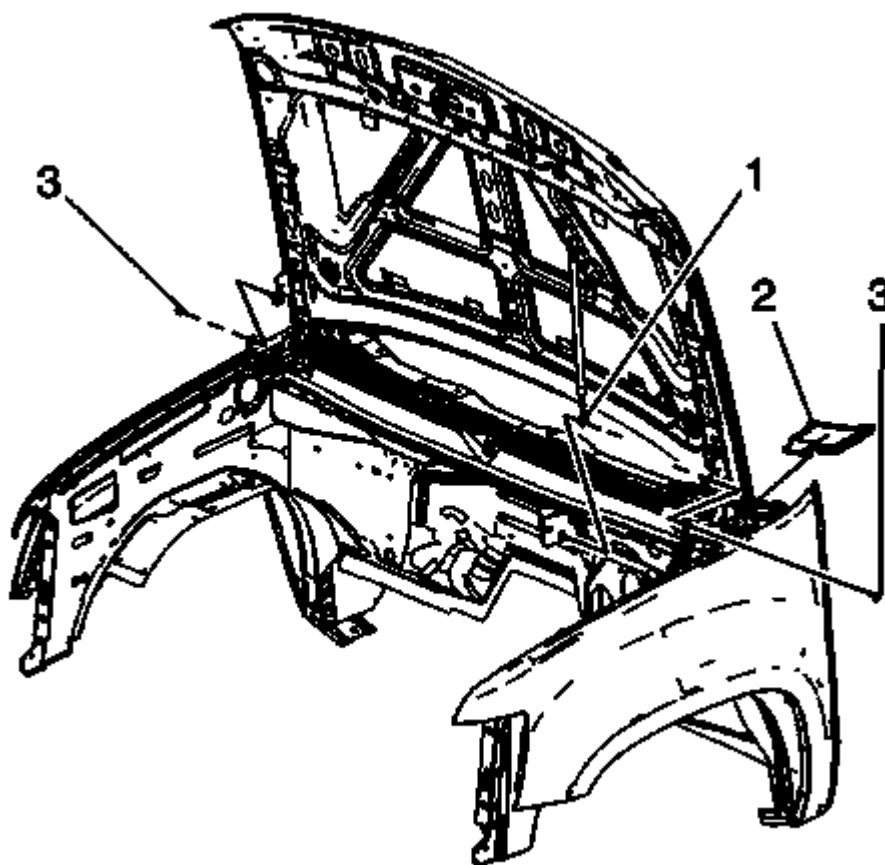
Hood Strut Rod, Grille End Caps And Hood Hinge Bolts
